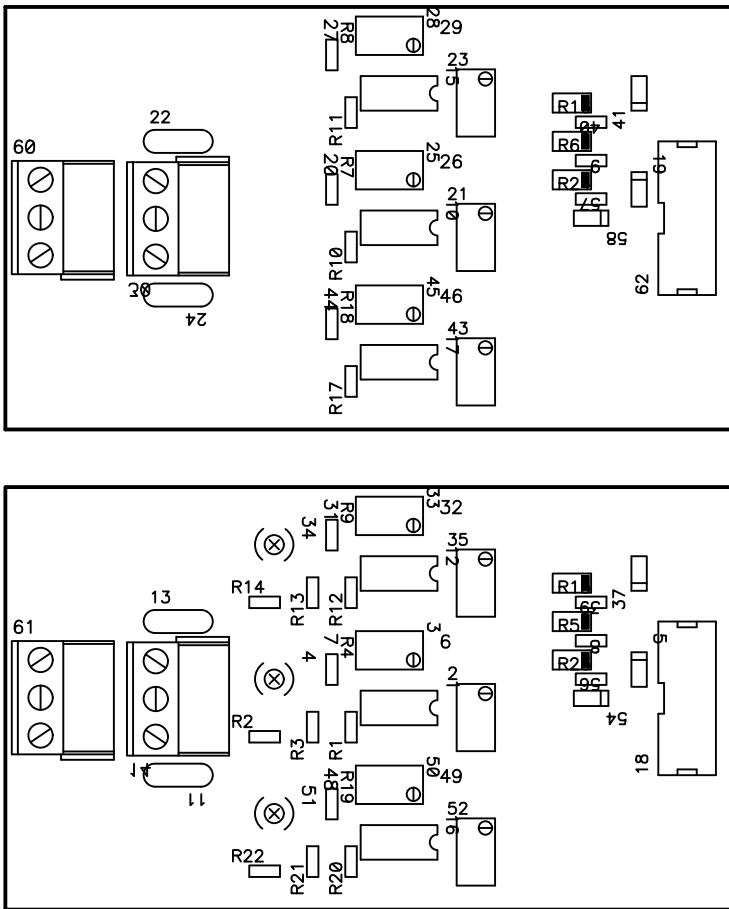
Printed Circuit Board Layout of the Expansion Board TOP Layer
